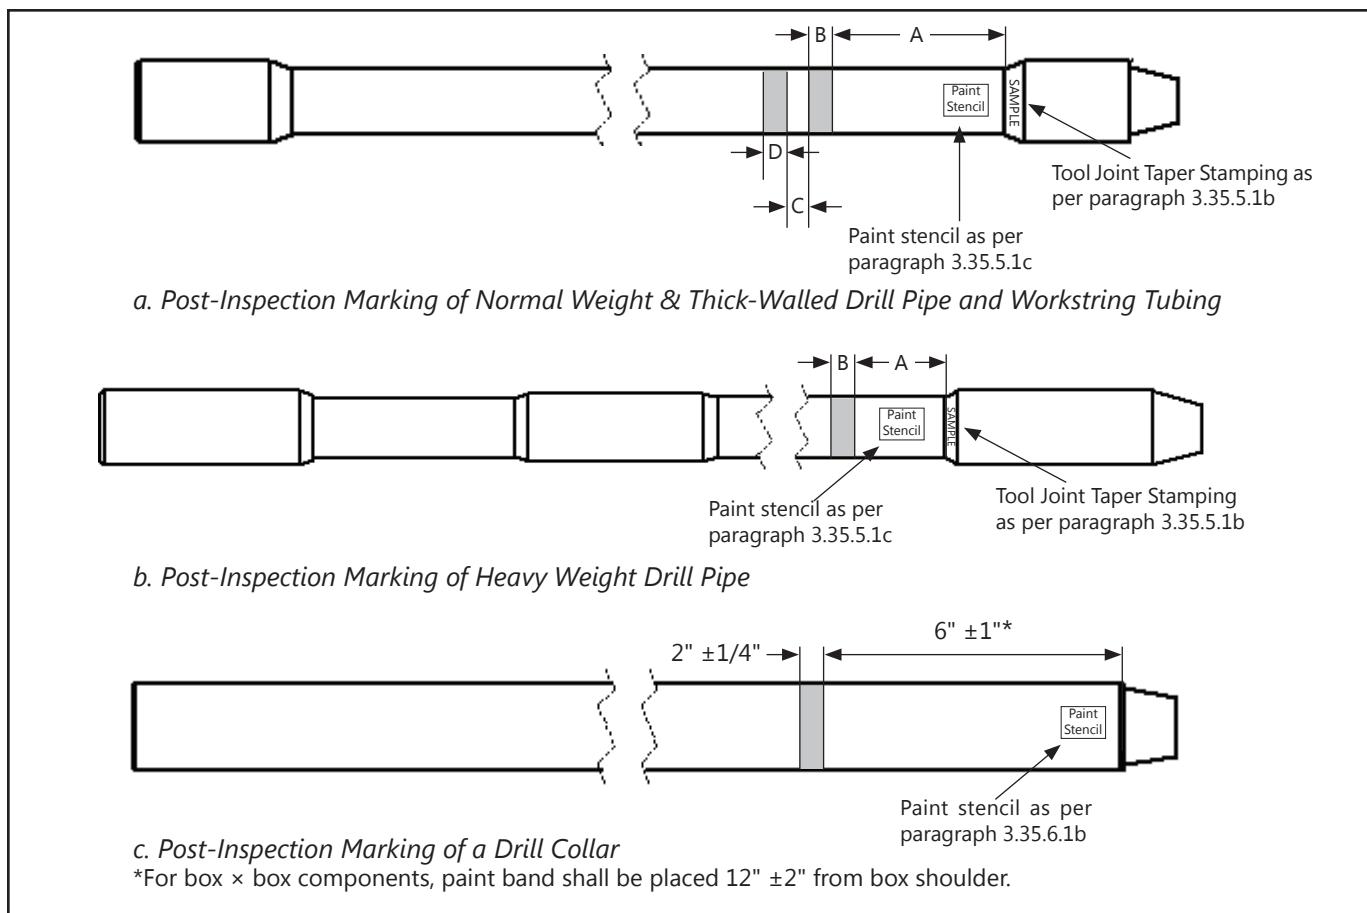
Post-Inspection Marking Scheme-A of Drill Stem Components
